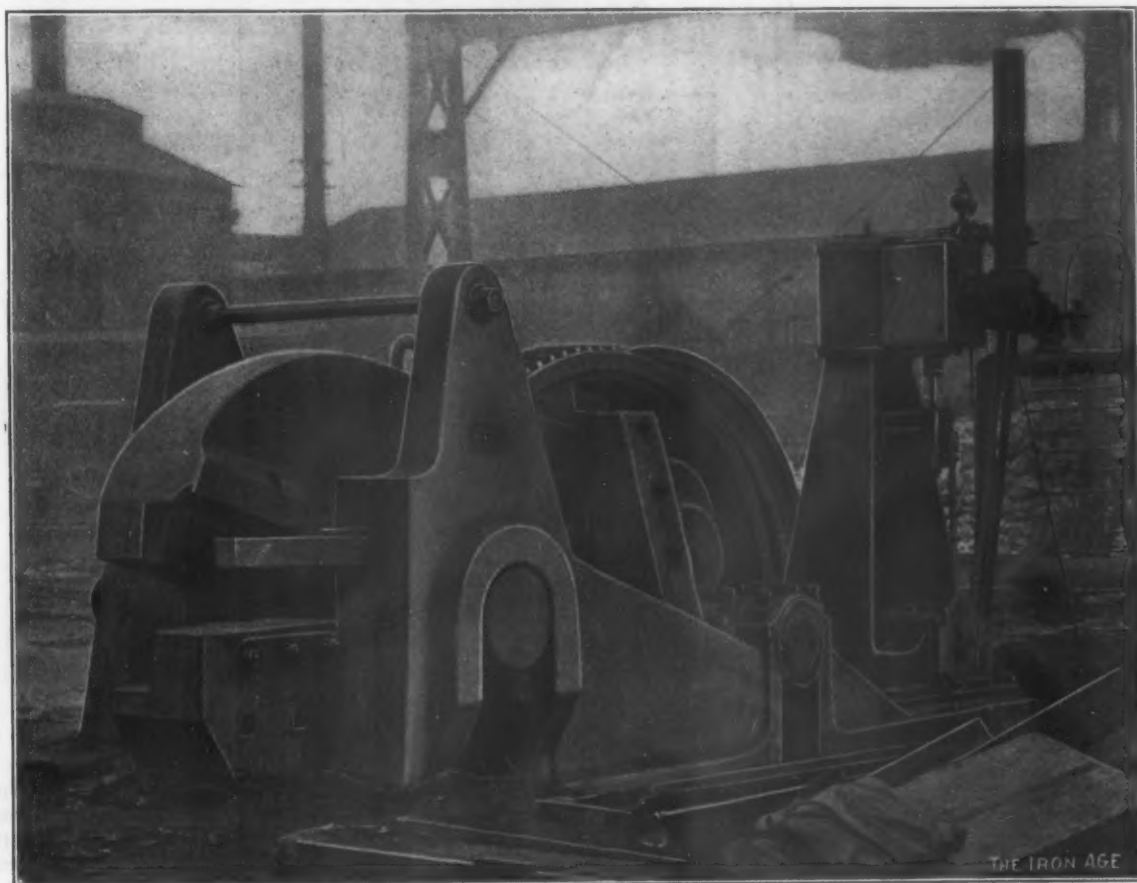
A No. 7 Lever Shear Built by the United Engineering & Foundry Company.
